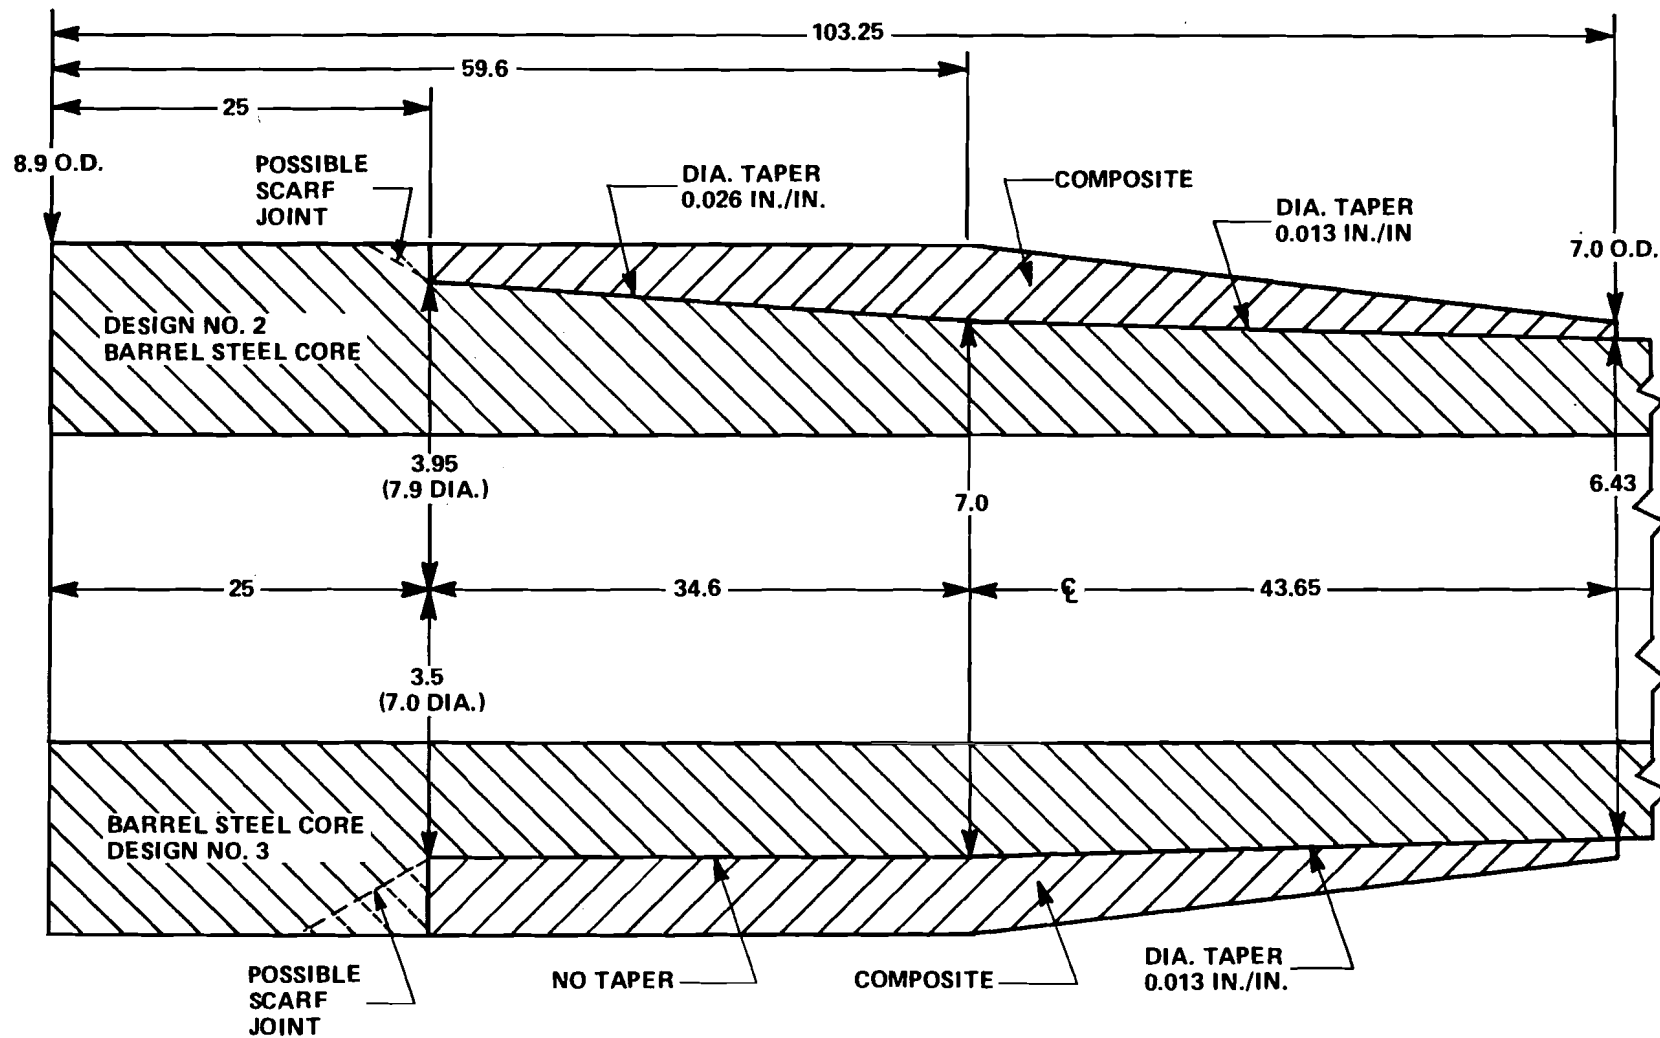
Supplementary Composite Tube Designs (Top-No. 1, Bottom-No. 3)
